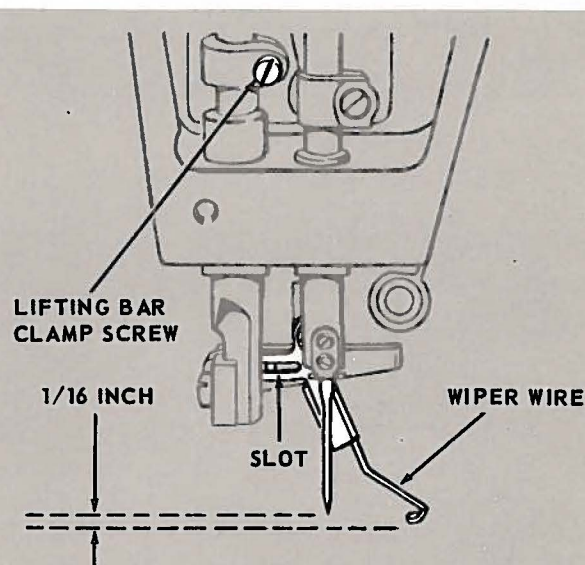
Adjusting Foot Lifter and Thread Wiper
